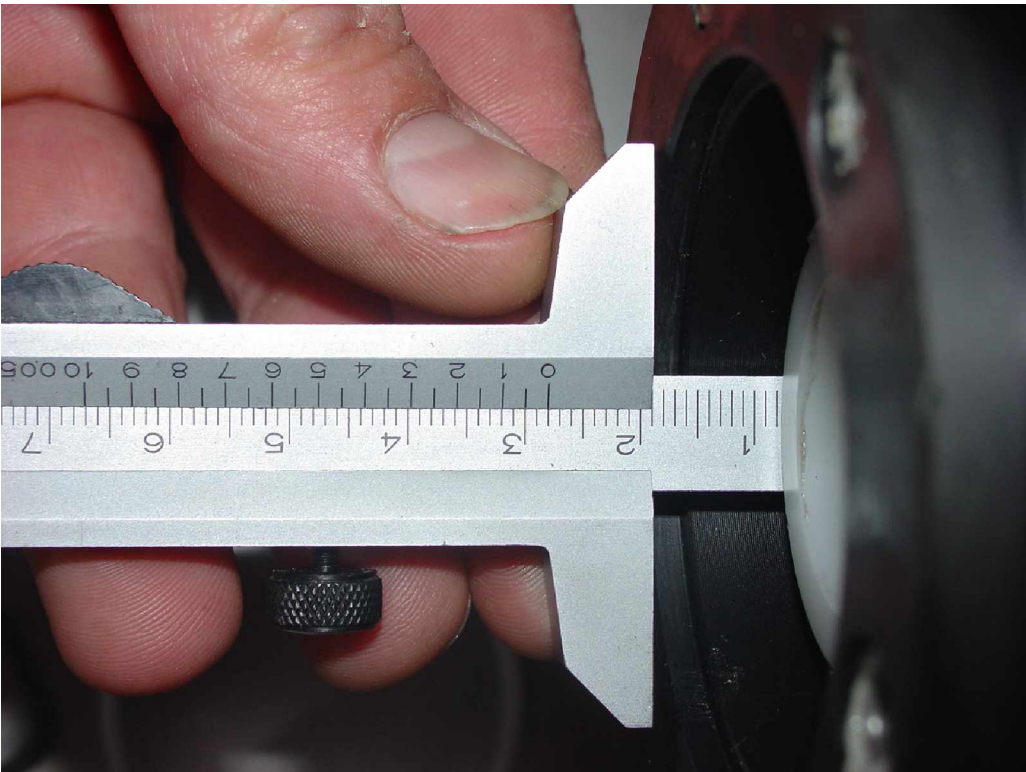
the rod with the existing intermediate layers. Take off the existing layers.
